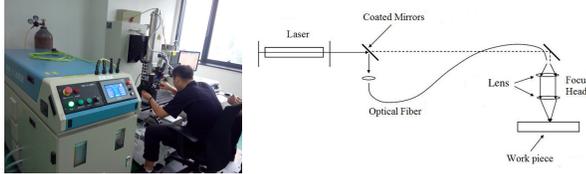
Equipment and schematic representation of Pulsed Laser Welding
